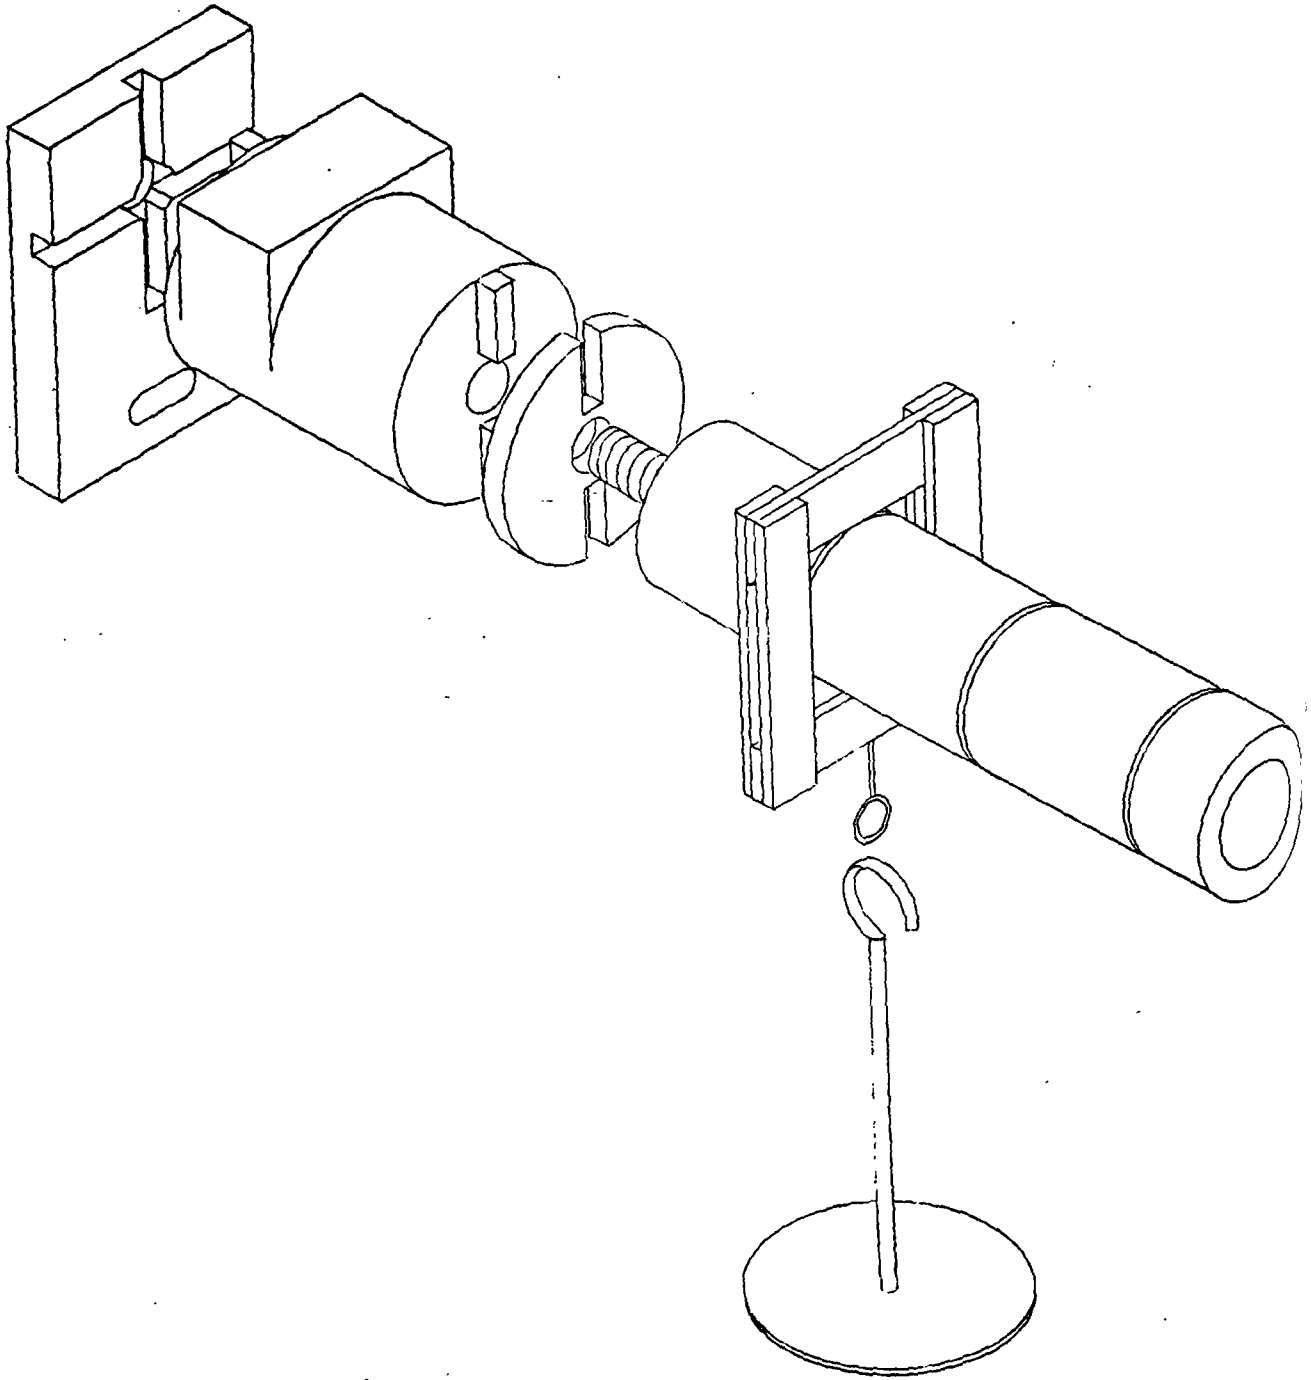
Exploded view of equipment used for F_{p_z} (shear) and M_{p_z} (bending) transducer channel calibrations, including from left to right: mounting base; transducer; 5 mm spacer; loading bar with three loading grooves placed at 0.10 m, 0.20 m and 0.30 m positions along its length; round edge hanger; and weight pan. This equipment was also used F_{p_x} (shear) and M_{p_x} (bending) transducer channel calibrations but the transducer was rotated clockwise 90 degrees to start that calibration procedure.
